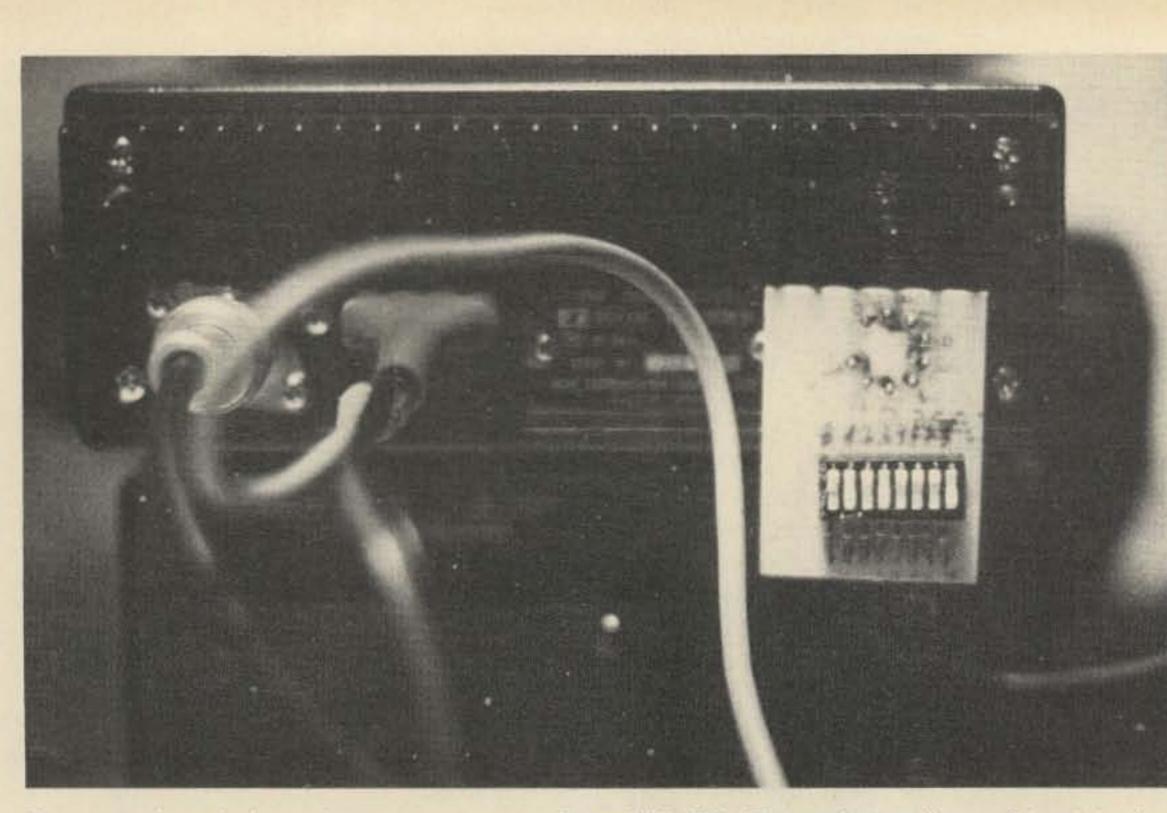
Parts placement. Parts side of PC board with switches. Note pin 6 is the common anode lug, while the other lugs have the wires on accessory socket going to the matrix board soldered to them to allow the board to be positioned parallel to the 22S. The prototype protruded downward in a precarious position. Also note that the plug is soldered onto the foil side of the board.
